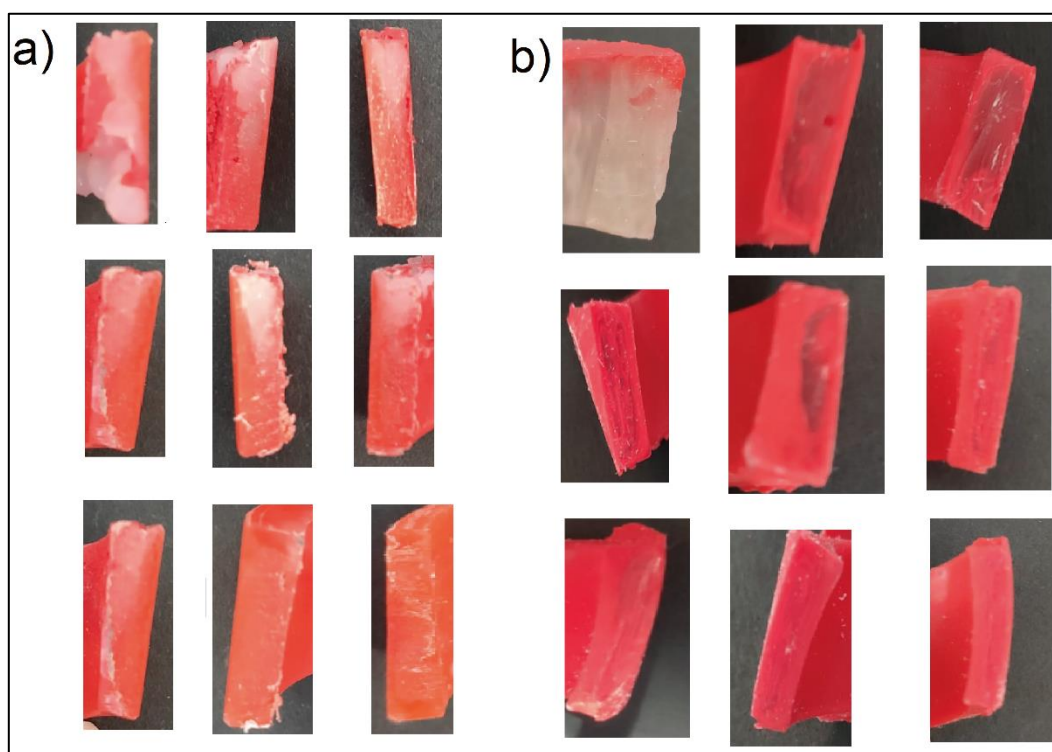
Examples of sections of the solidified extruder channel in the micro extruder for a) PLA; b) SEBS.
